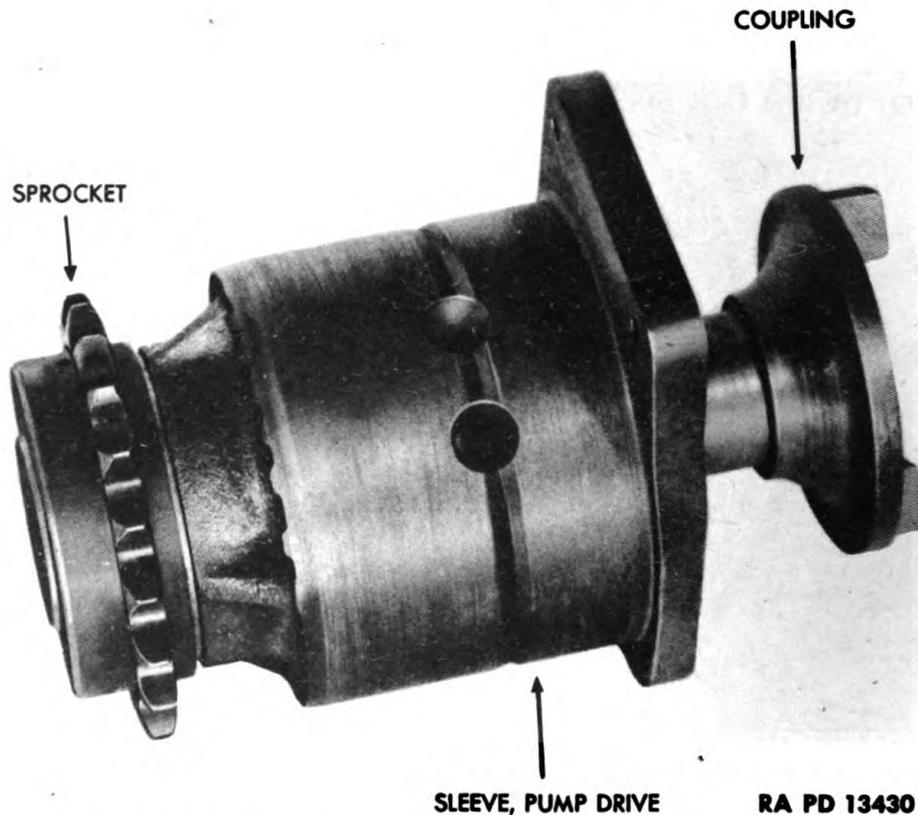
Fuel Injection Pump Drive Sleeve Assembly
